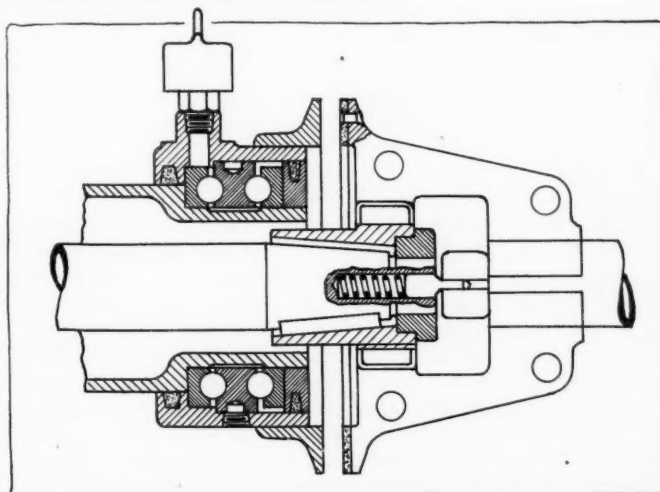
Sectional view of coupling between clutch and gearbox of Thomas model M
